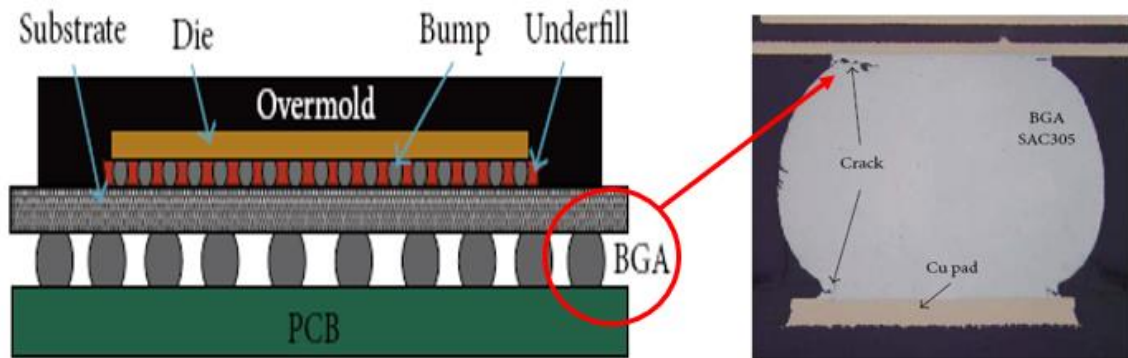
Crack Analysis of Solder Joint [69]
